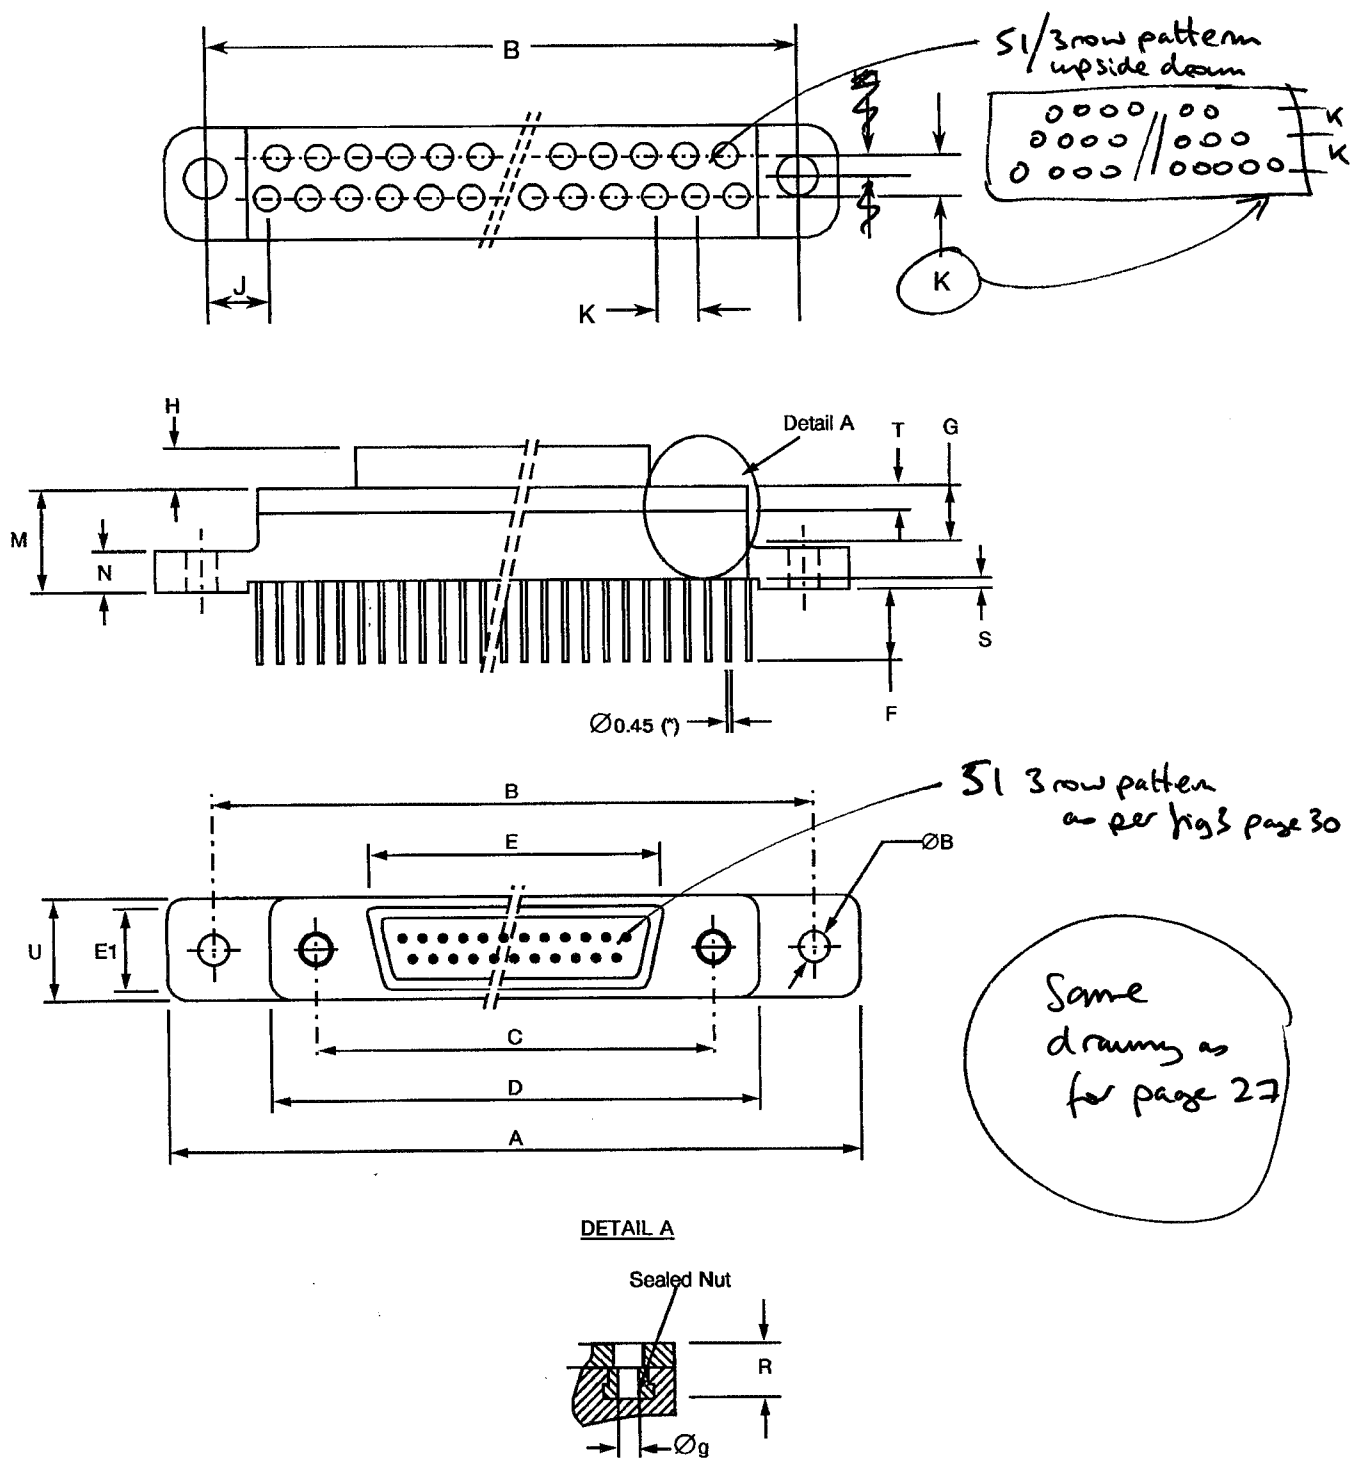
PHYSICAL DIMENSIONS (CONTINUED)
